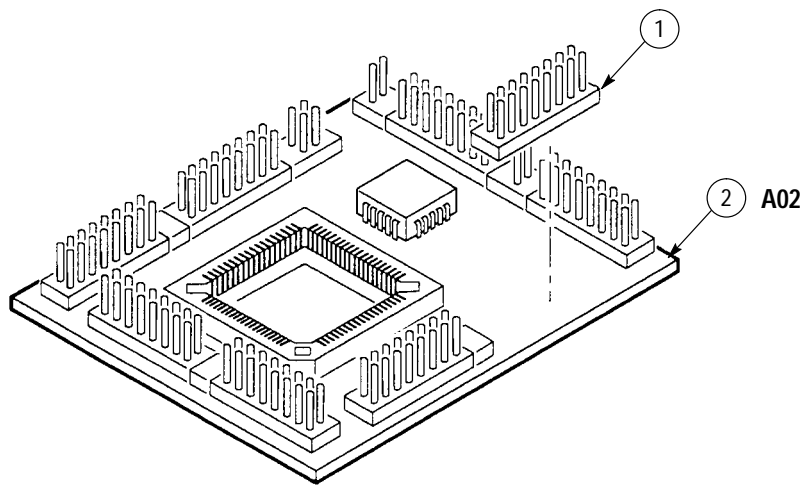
80186/80188 PLCC probe adapter exploded view
